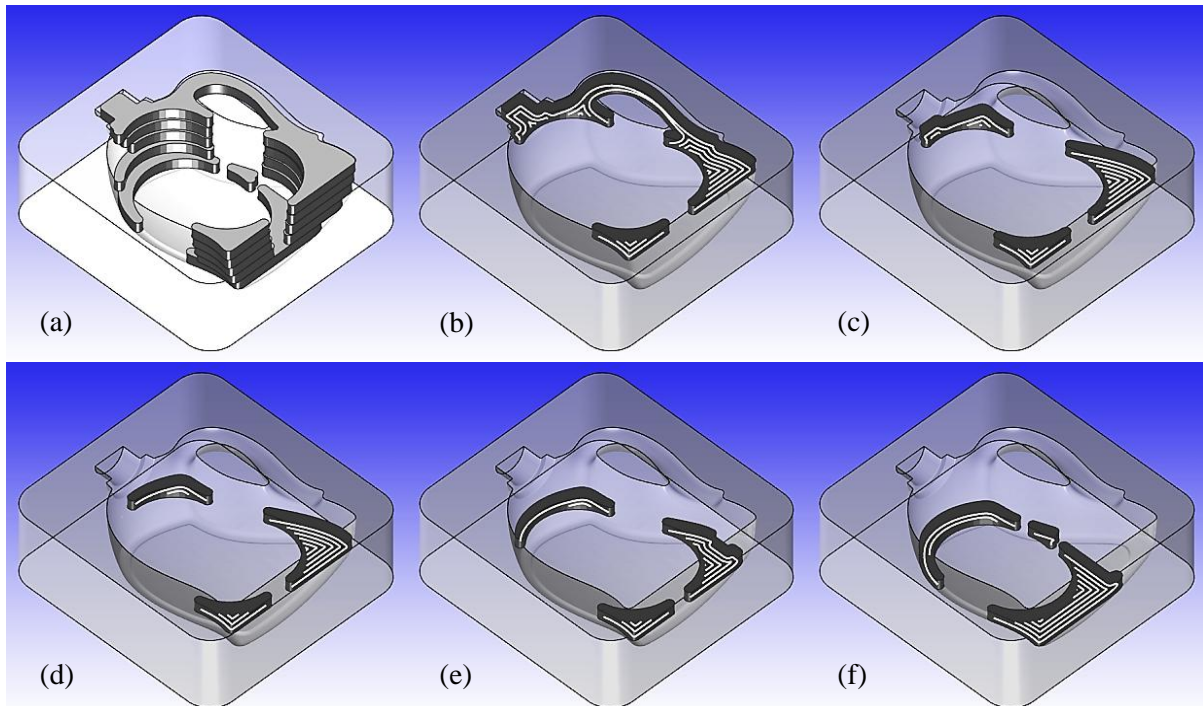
An example of using two tools machine the entire cavity. *The second tool accessible volume and tool path.* (a) Tool accessible volume. (b) First machining layer.(c) Second machining layer. (d) Third machining layer. (e) Fourth machining layer. (f) Fifth machining layer.
